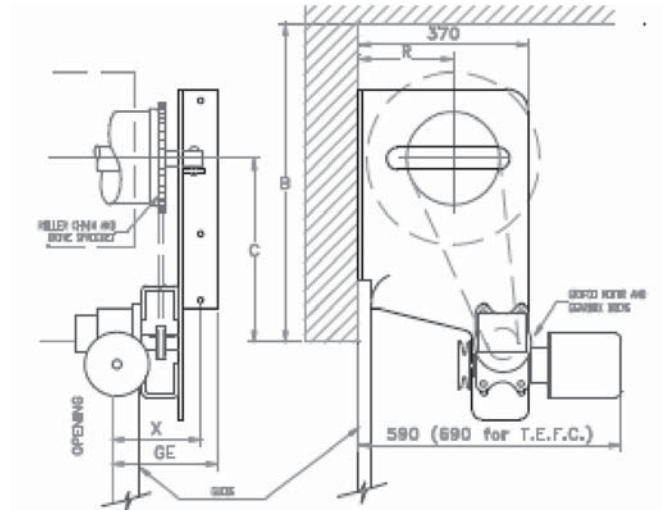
BRACKETS LAYOUT WITH OUTSIDE MOUNT MOTOR
